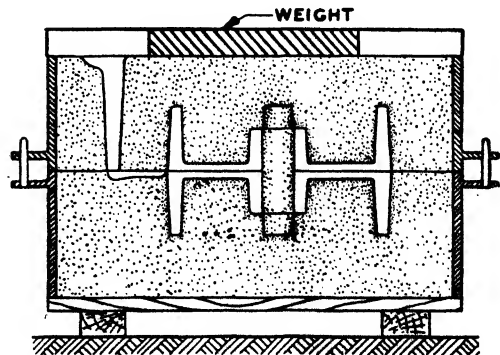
PATTERN REMOVED, RUNNER CUT,
